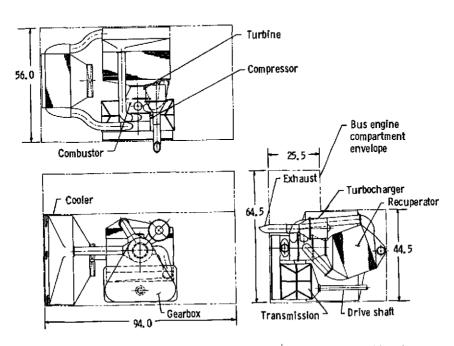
Group III 400-horsepower, single-shaft bus component layout.
